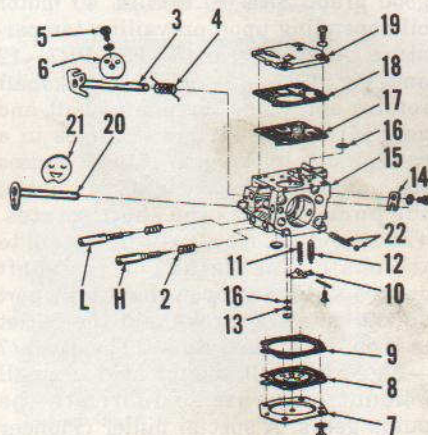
Exploded view of Tillotson HS carburetor used on late models. Refer to Fig. PR7-1 for legend except for retaining ring (13).
